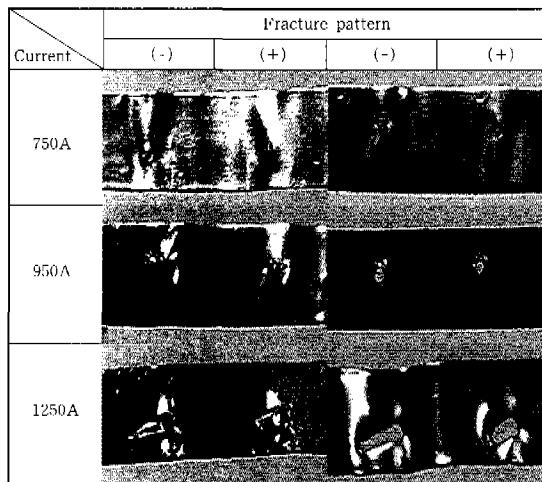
Fracture pattern by welding current(34.3N)
